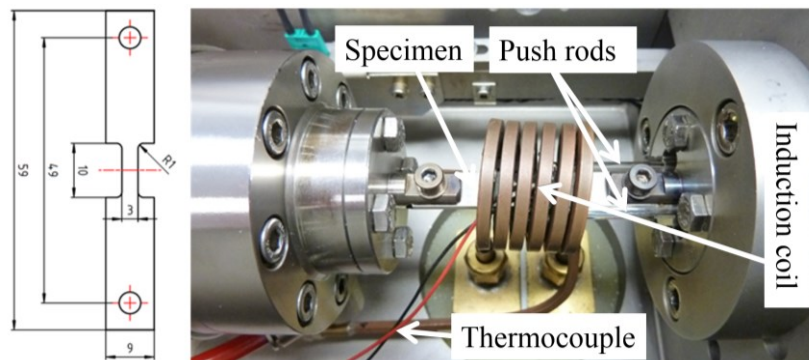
left: Geometry of mini-flat tensile specimen; right: Measuring device
